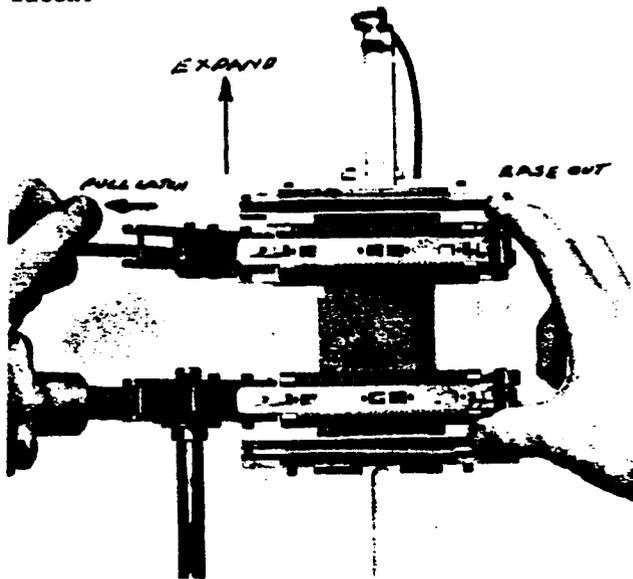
EXPANDING THE TOOL (PAR. 3.244)
